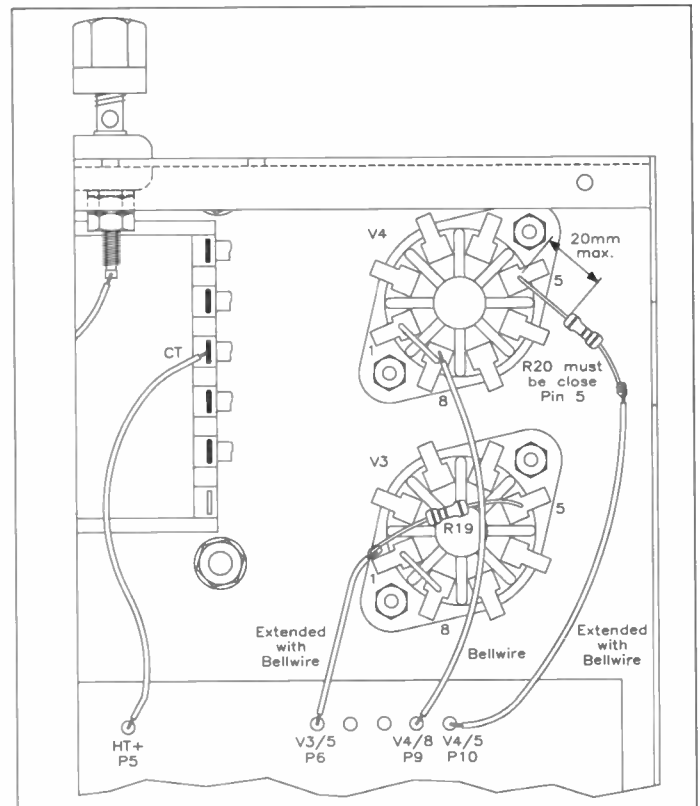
Connecting resistors R19 & R20, and wire link between V4 pin 8 and PCB.
